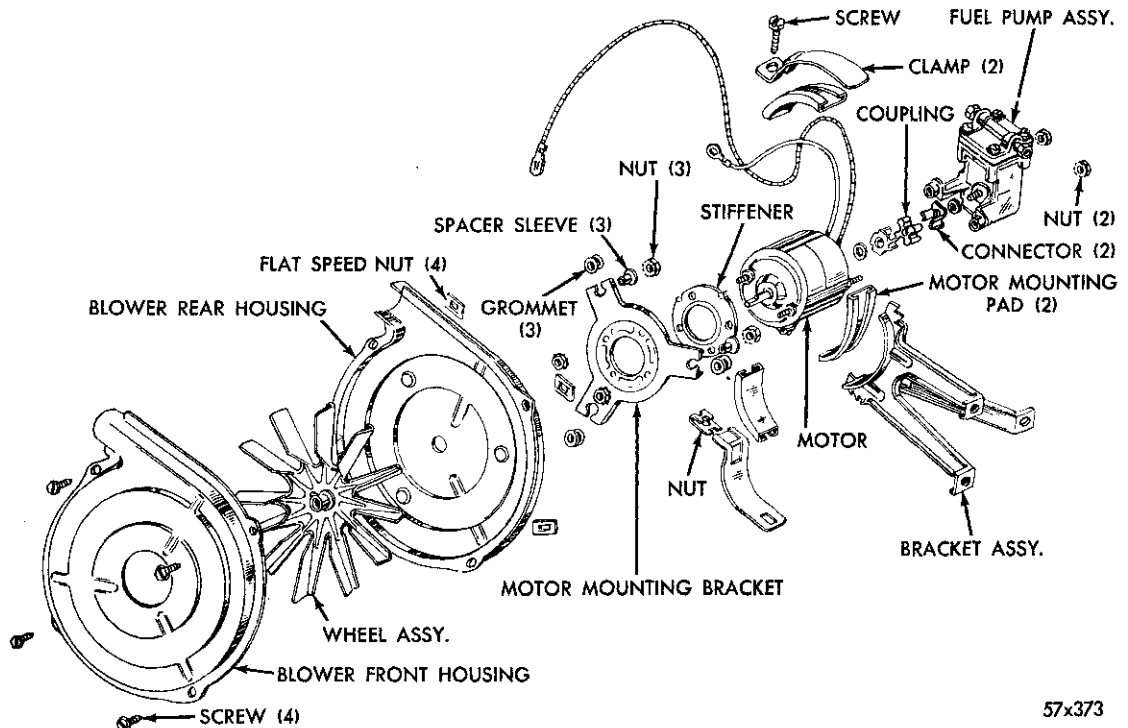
Fuel Pump and Blower Assembly (Disassembled View)
